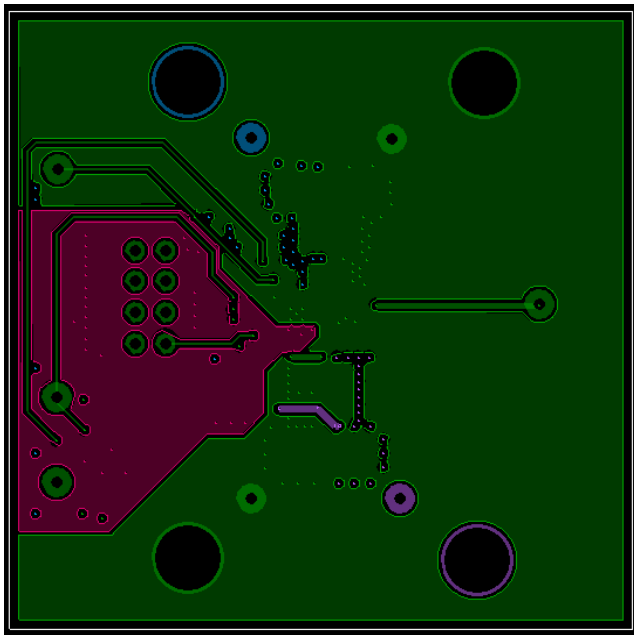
INNER LAYER 2 (TOP VIEW)
